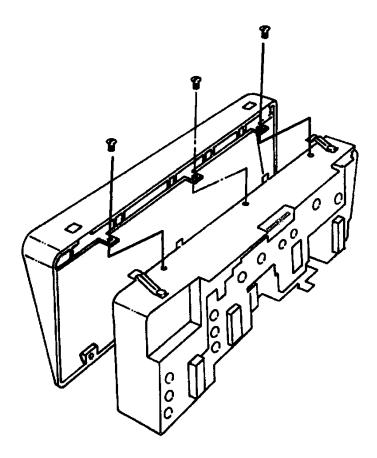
Remove Bezel Screws Fastening Bezel to Cluster Housing
